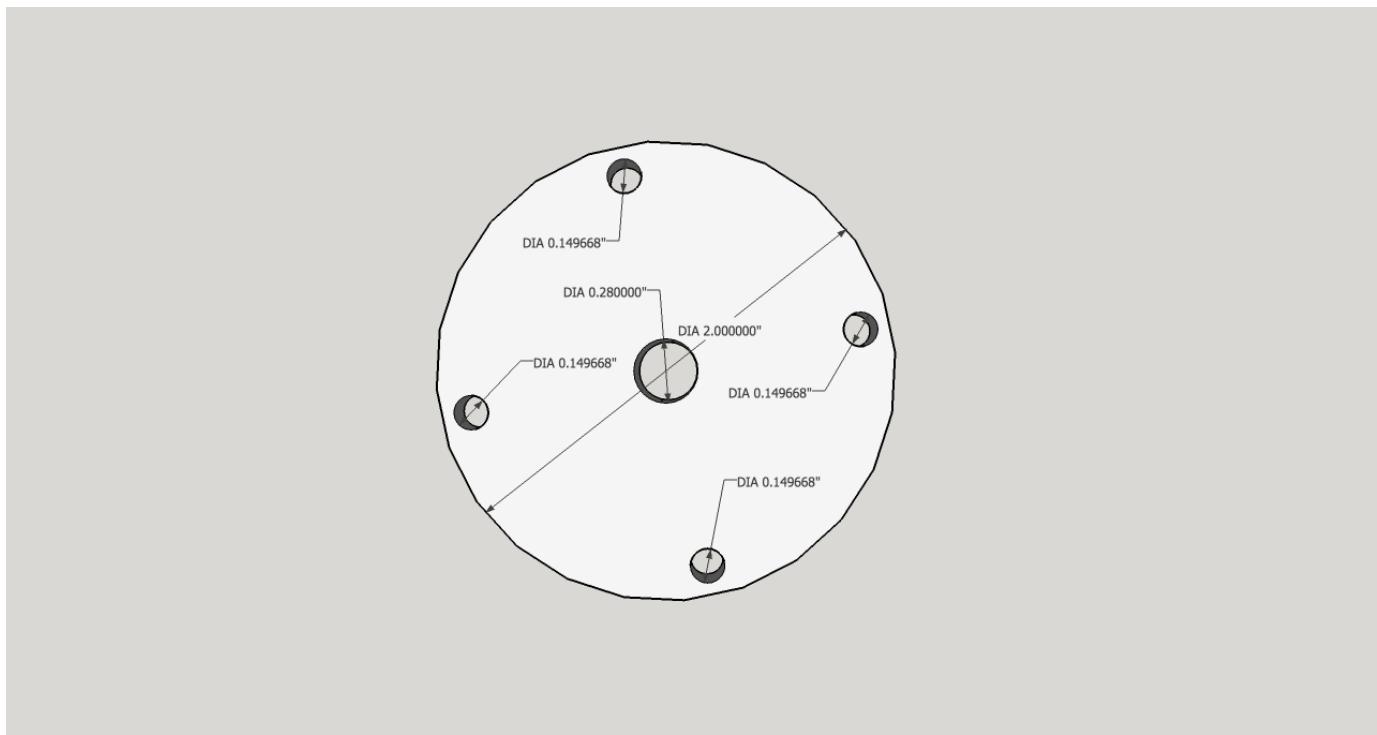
The bottom up view and measurements of the PZT-Mirror holder
